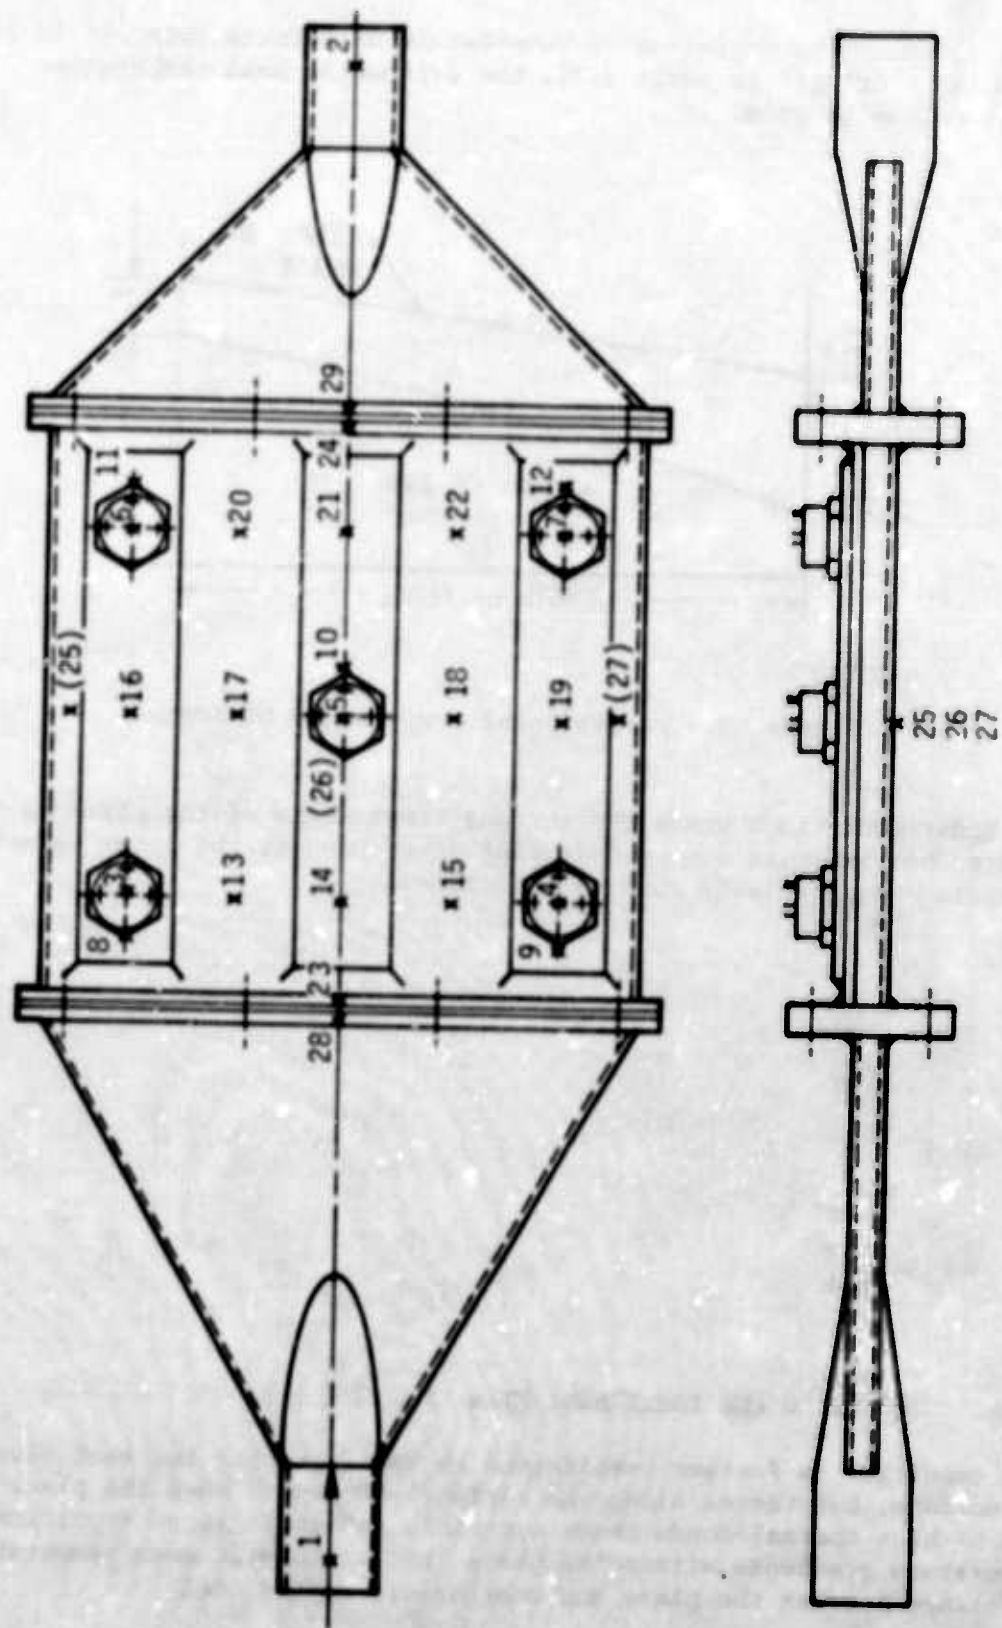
Air-Cooled Cold Plate No. 1 with Manifold Configuration #1
